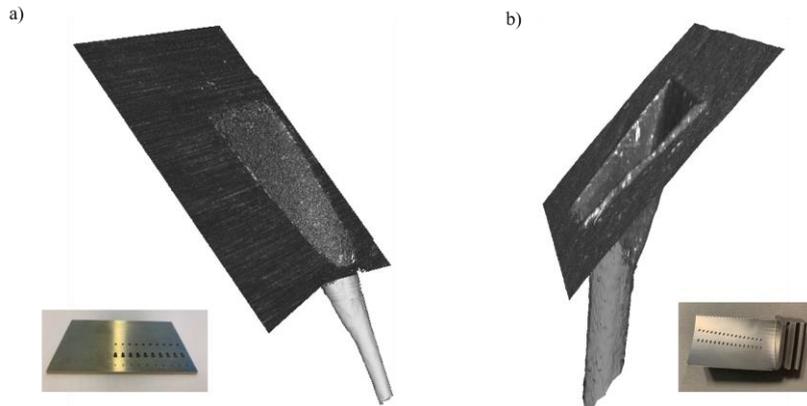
3D measurements of cooling holes by FV and VFP. The FV measurement of the top surface is fused with the VFP measurement of the hole. a) Cooling hole of the measurement artefact. b) Cooling hole of a turbine blade.
